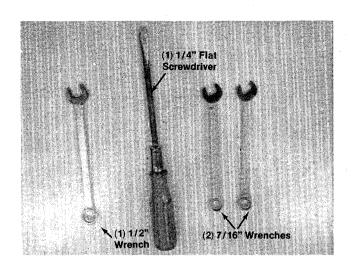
TOOLS REQUIRED FOR ASSEMBLY
